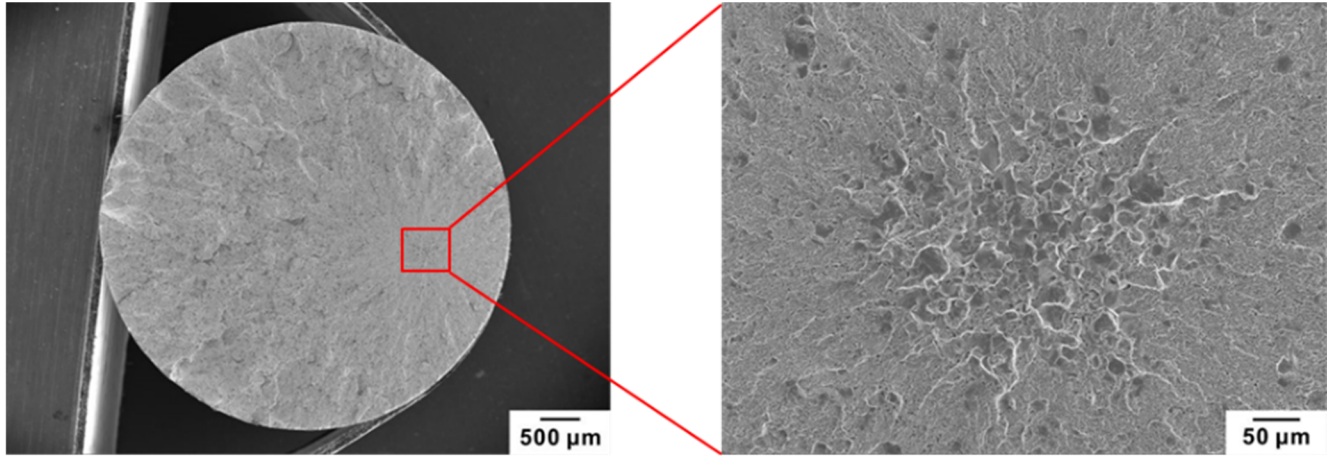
Fracture surface of the bearing steel specimen.
